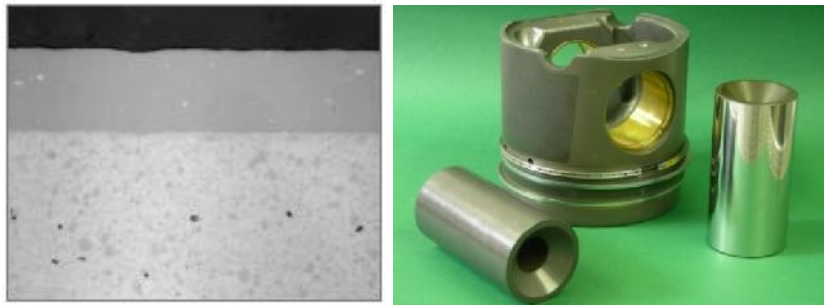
DLC® - coating [9] (left) and Ceramic piston pin for internal combustion engines [10] (right)
